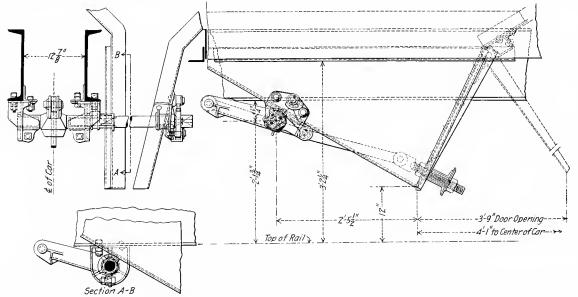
Door Operating Apparatus with Lind Safety Clutch for All-Steel Hopper Car. Pressed Steel Car Company.
